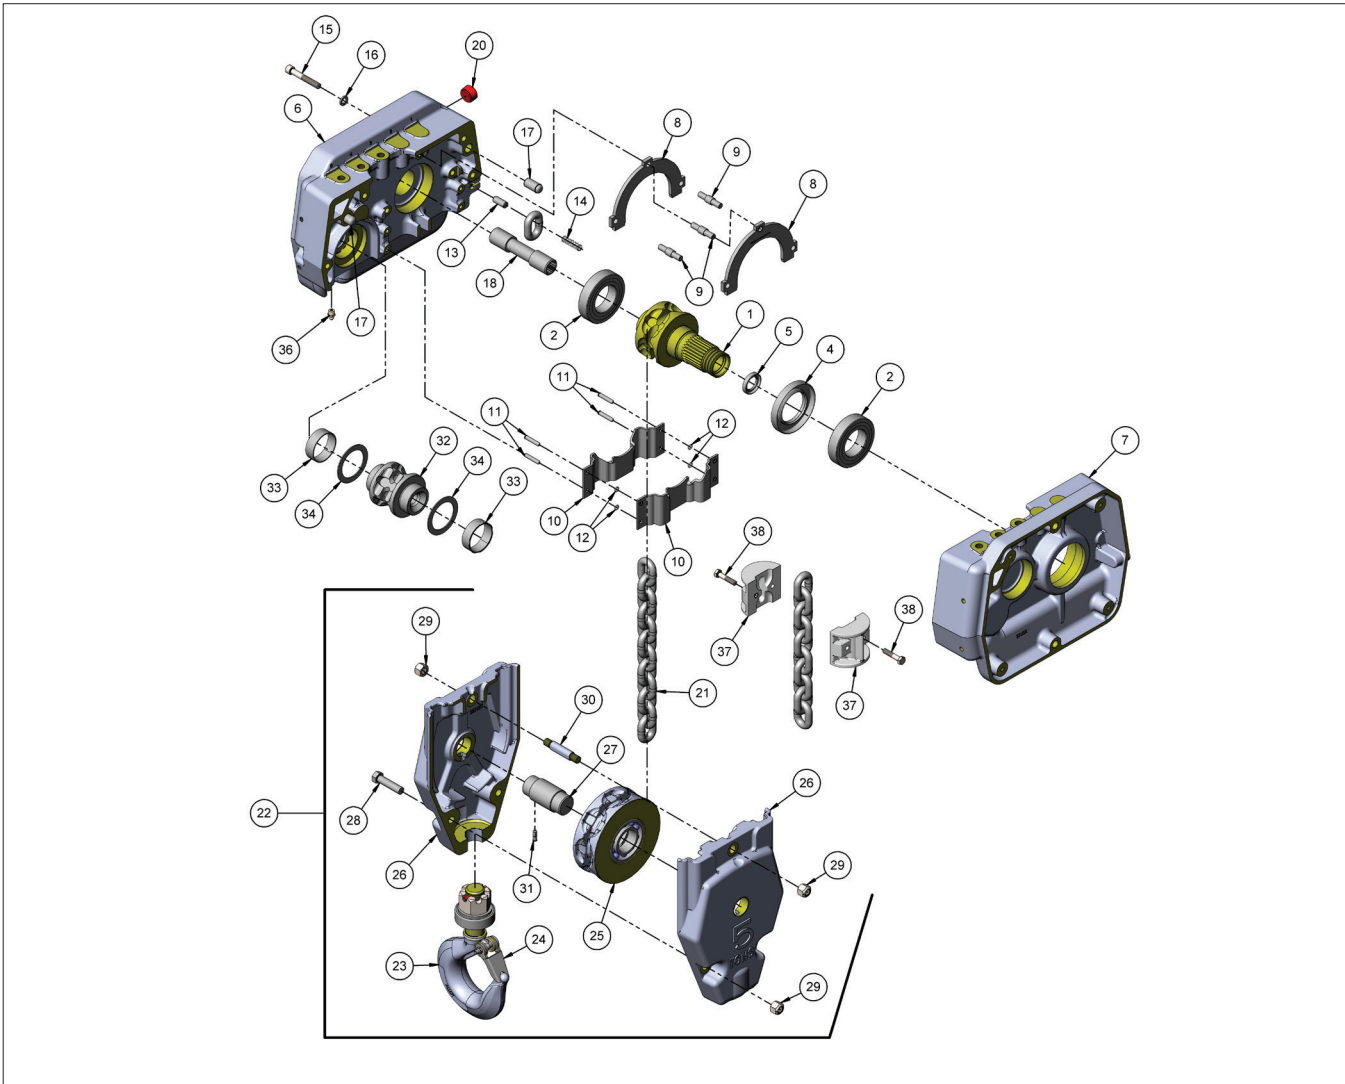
C. CHAINING PARTS (TRIPLE CHAIN)
